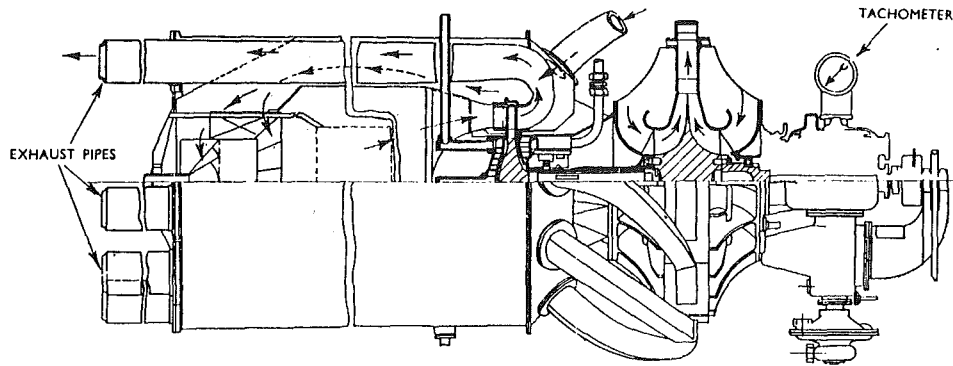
Second assembly of Whittle's experimental turbojet engine ([14], reprinted with permission of *Proc. IMechE*)
